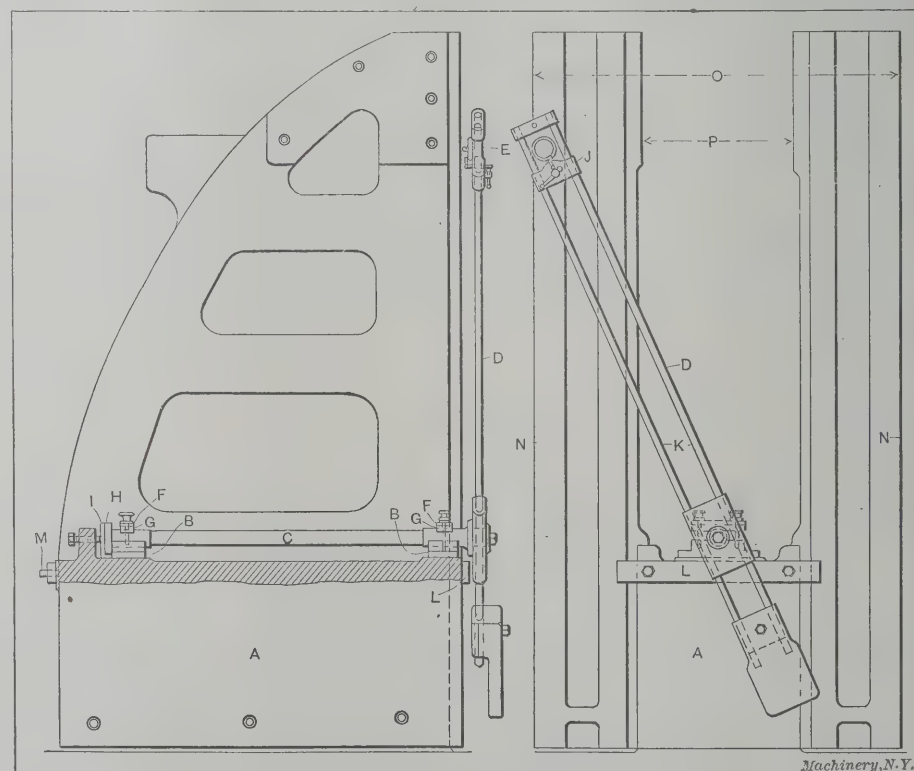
Special Fixture used for Testing Alignment of Housing Faces and provided with Sweep for Carrying Starrett Indicator
